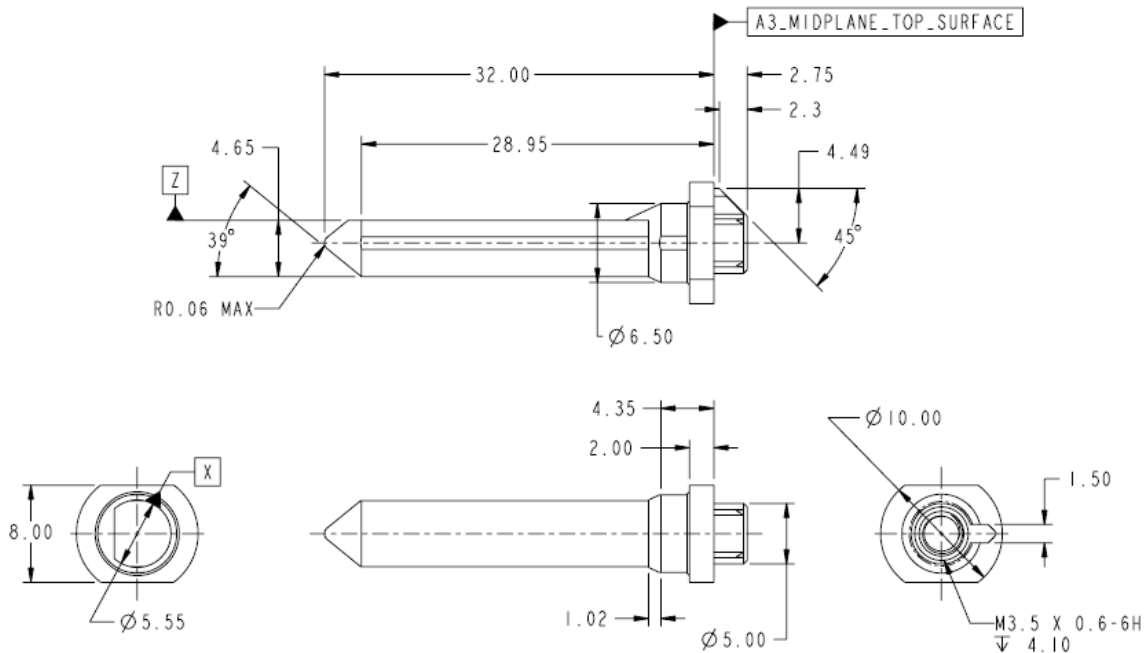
SBBMI Midplane Guide Pin Dimensions¹
